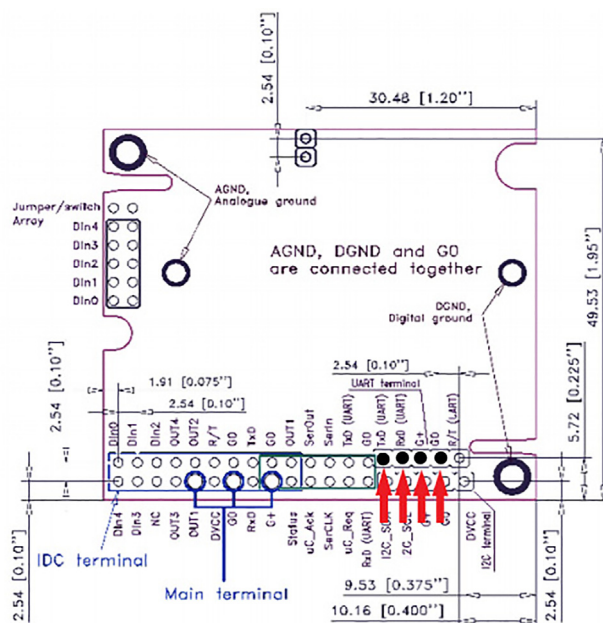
The CO₂ Sensor layout with red arrows indicating where to solder the 4-pin male headers.
